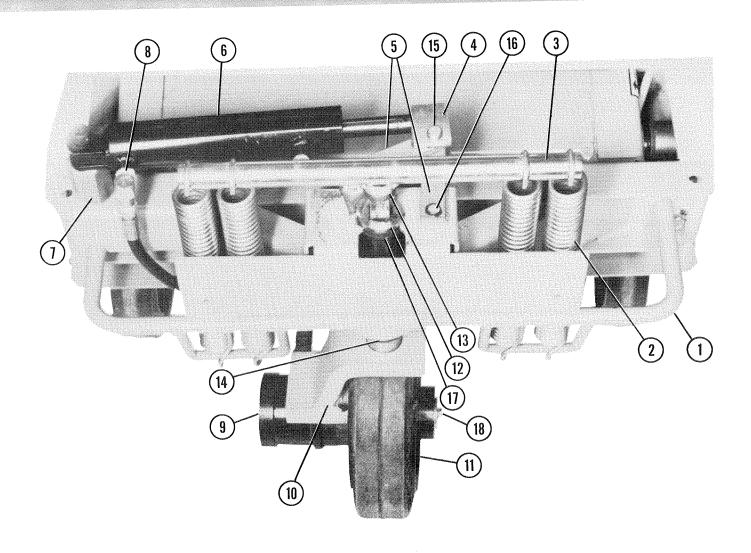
Front Drive Assembly, 1-Wheel Drive PM (115, 119)
